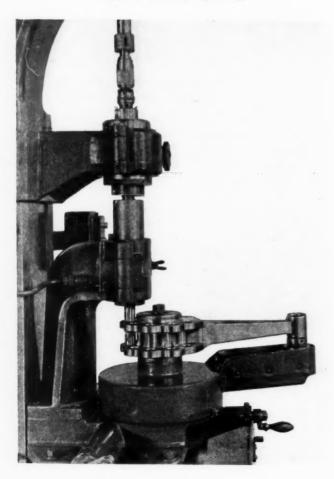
Six Arm Bores of This Propeller Shaft are Honed Straight and Round within Limits of 0.0003 Inch
